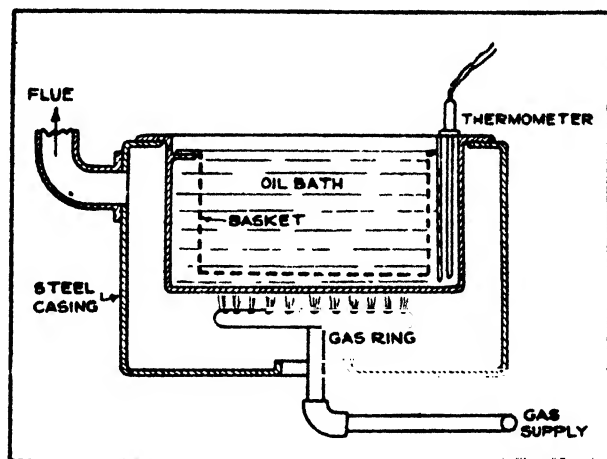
AN OIL TEMPERING BATH, WITH WIRE BASKET FOR HOLDING THE STEEL PARTS
